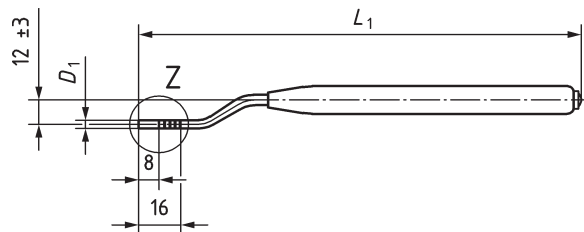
Type 1, Form B: Sinutome, offset shaped
